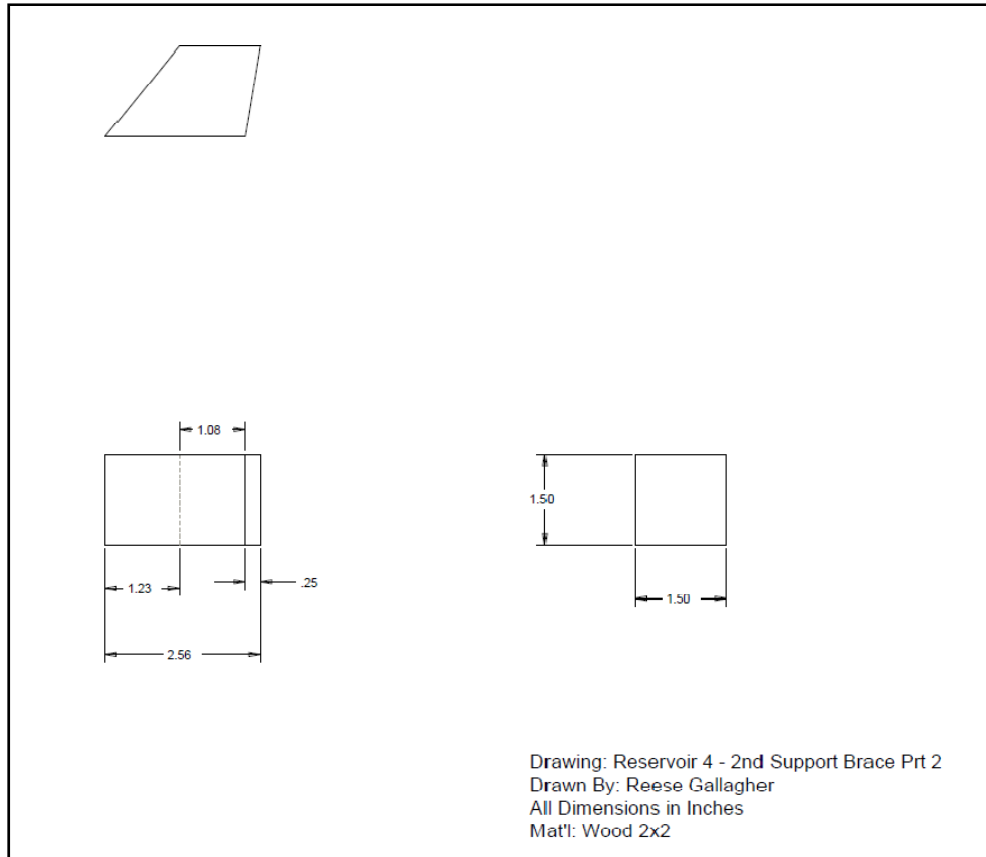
Reservoir 4 2nd Support Brace (prt. 2) dimensional drawing
